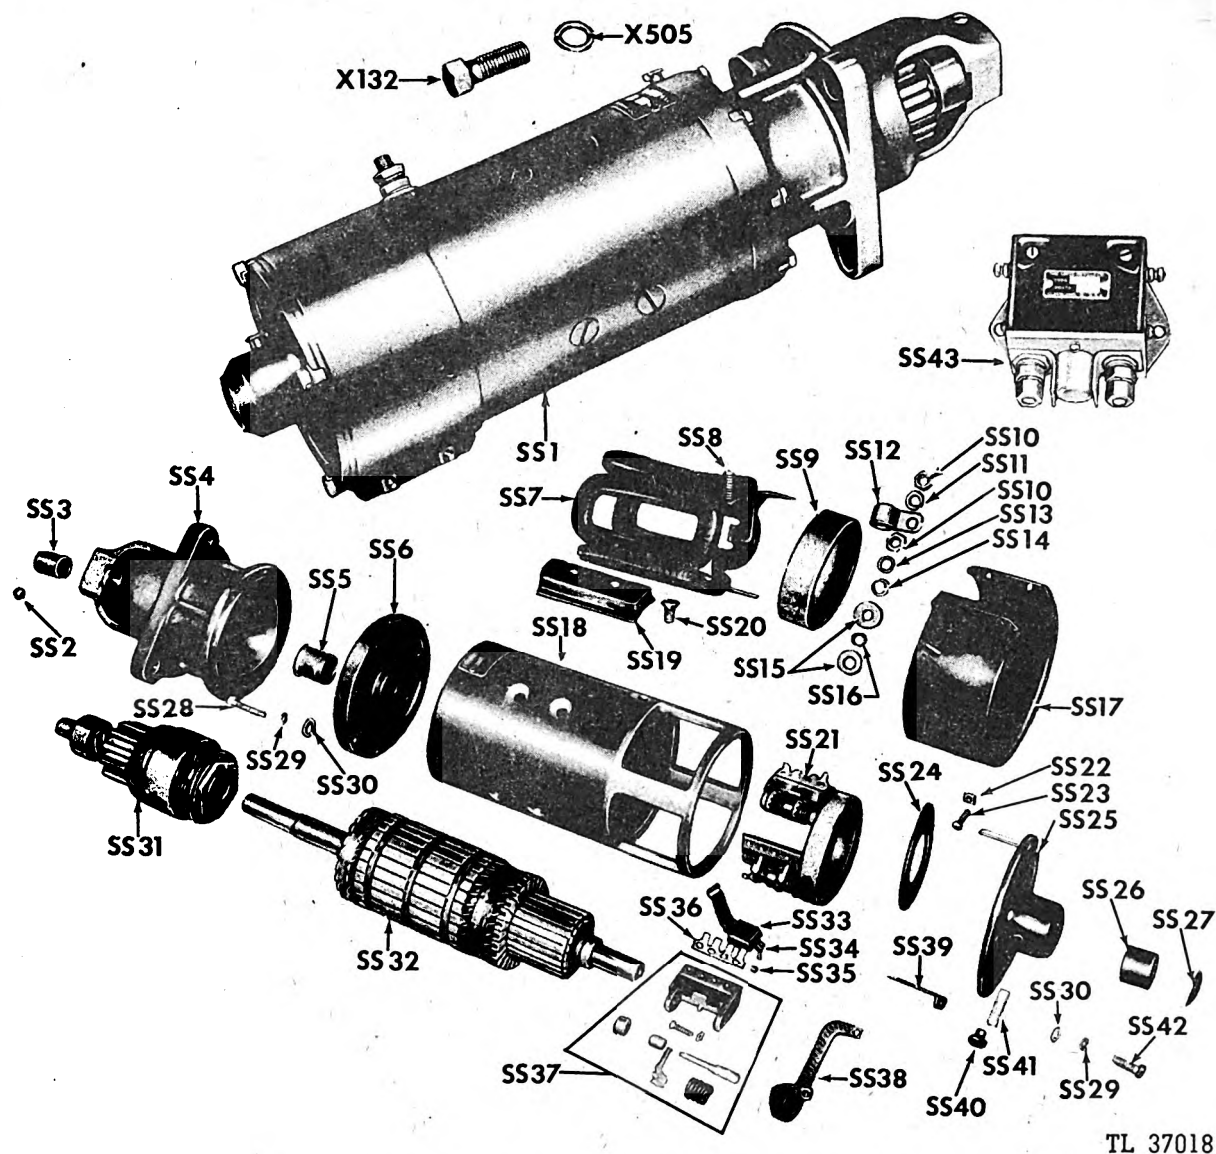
Starting Motor and Magnetic Switch with Starting Motor Exploded
